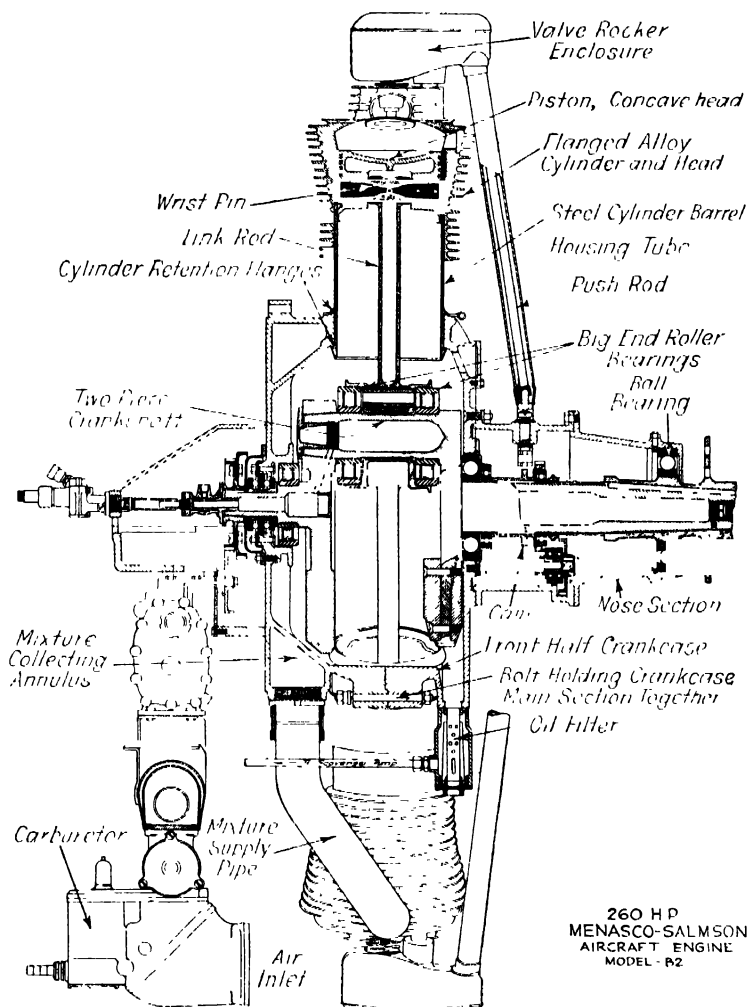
Sectional View of Menasco-Salmson Aircraft Engine, Model B2, Showing Construction of Parts.
